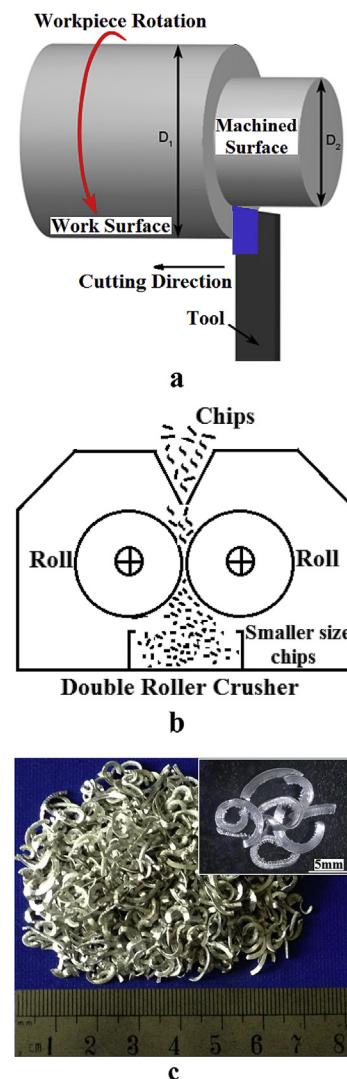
Production stage of initial chips; (a) Turning operation, (b) roller Crusher, (c) broken chips with the roller.
